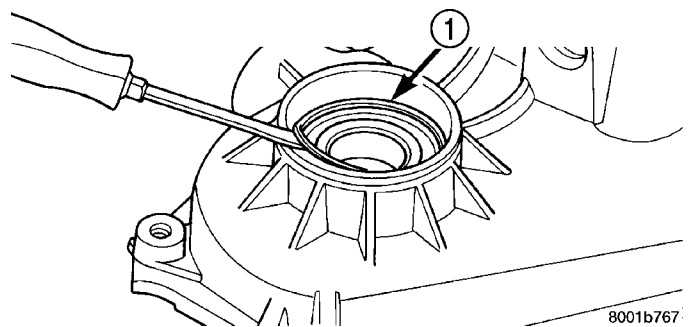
Installing Output Shaft Front Bearing Retaining Ring
